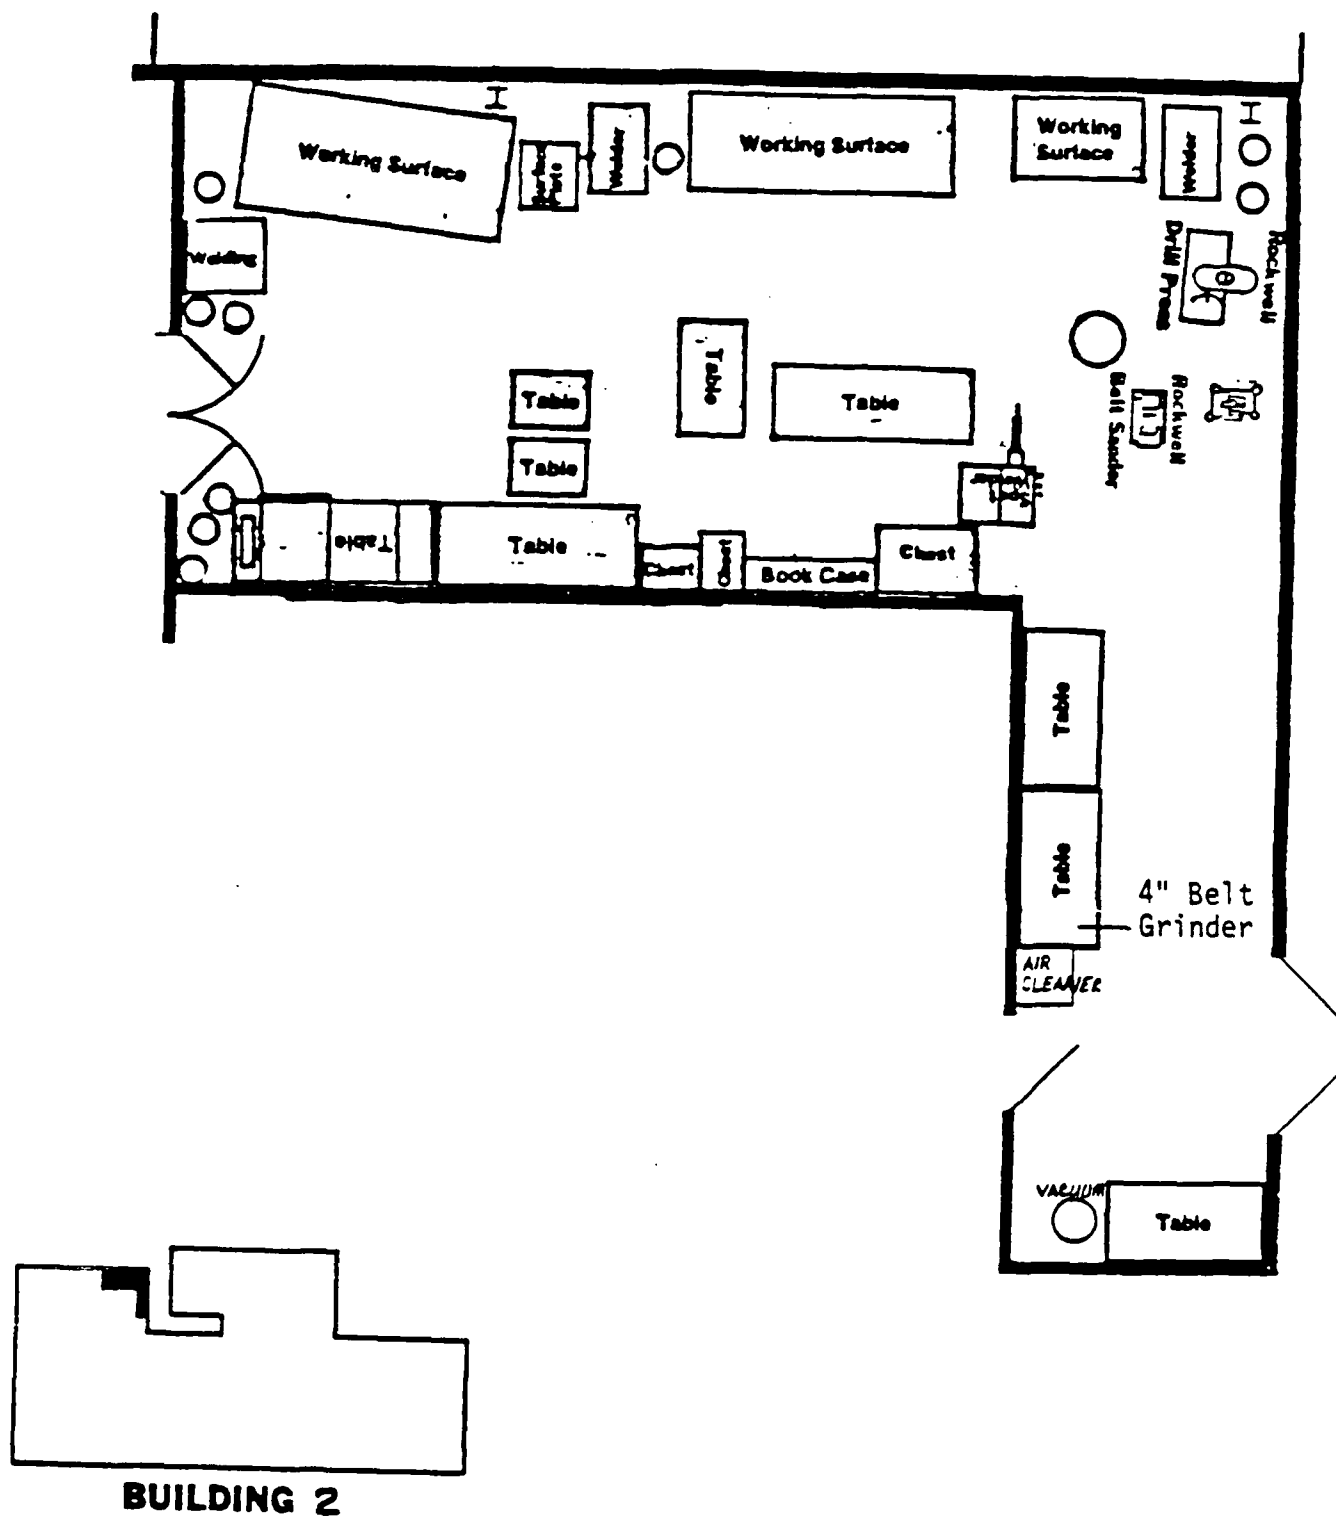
IMPROVED WELD SHOP LAYOUT
